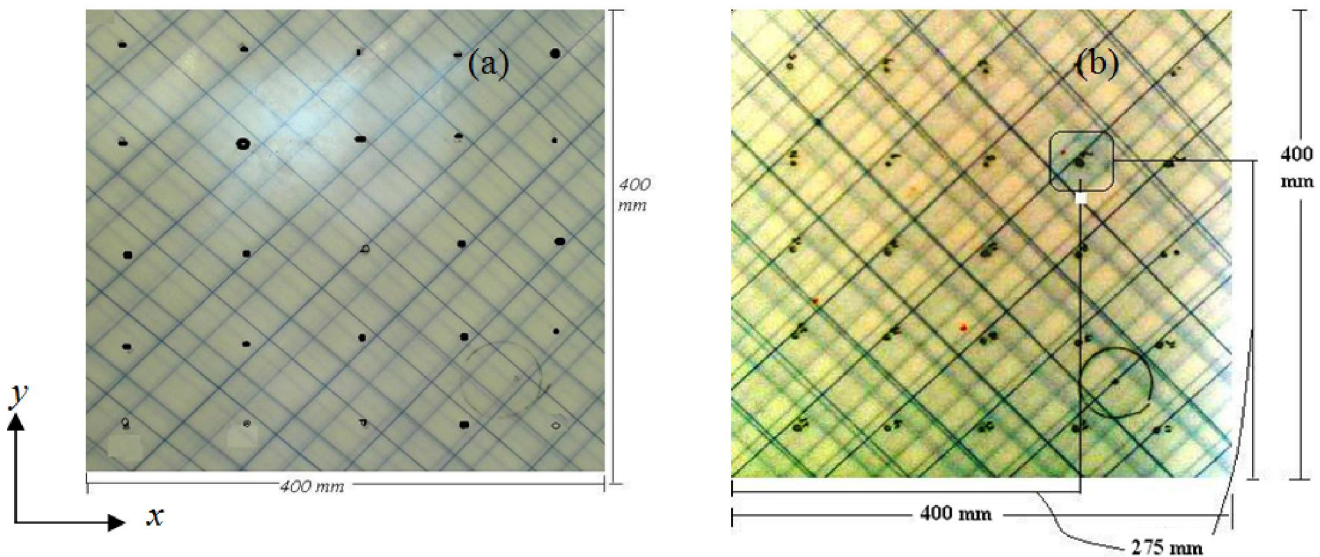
Typical test plates of E-glass fibre, (a) no delamination, (b) delamination at coordinate location (275mm, 275mm)
